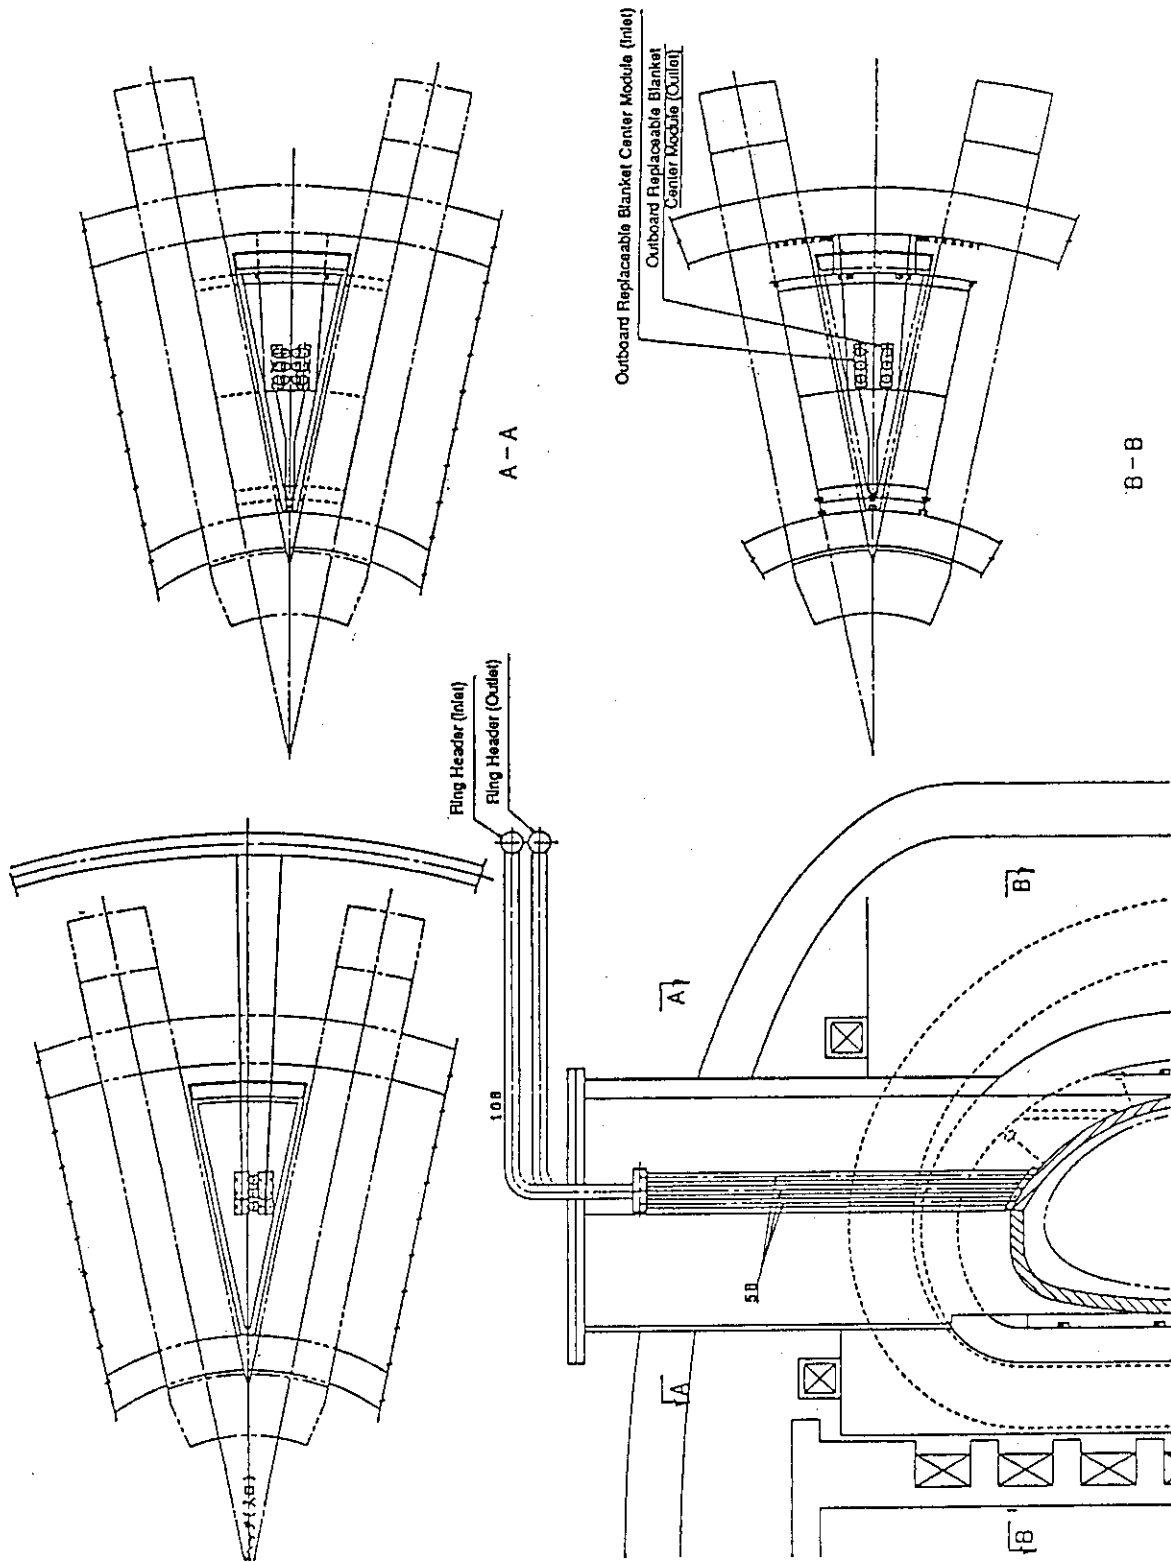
Coolant pipe arrangement for outboard replaceable center module.
